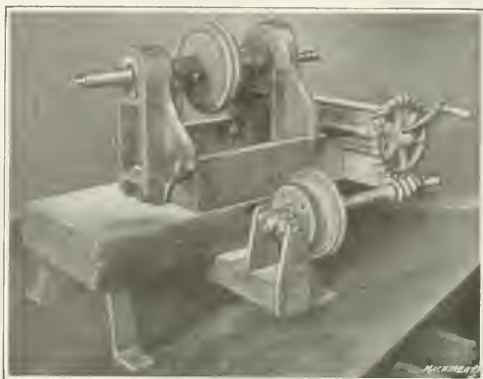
Milling Machine built by Eli Whitney about 1818, supposed to be First Milling Machine built, Now in the Mechanical Engineering Laboratory of Yale University
